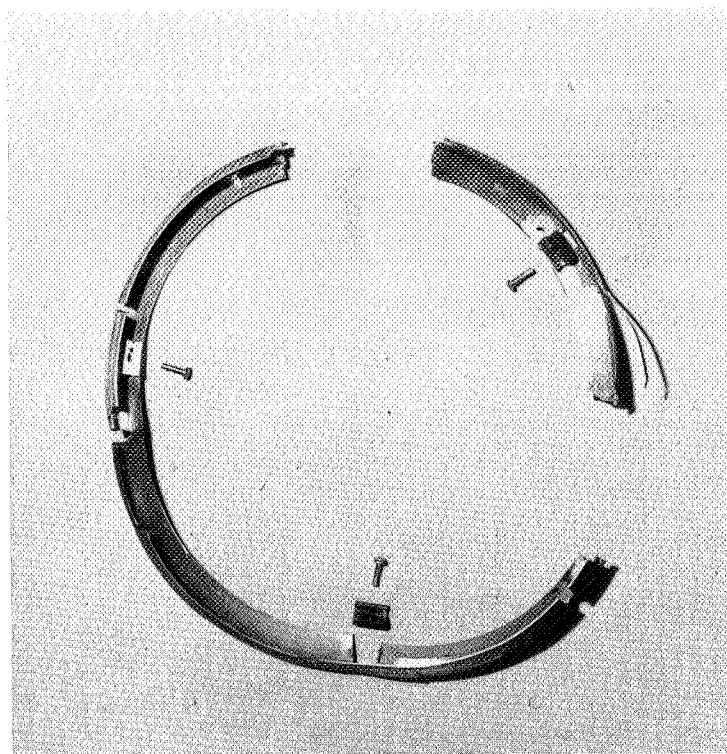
Oil Baffle Which Fractured During Dynamic Testing of Build 2 of the Oil-Film Seal (XP-94851)
